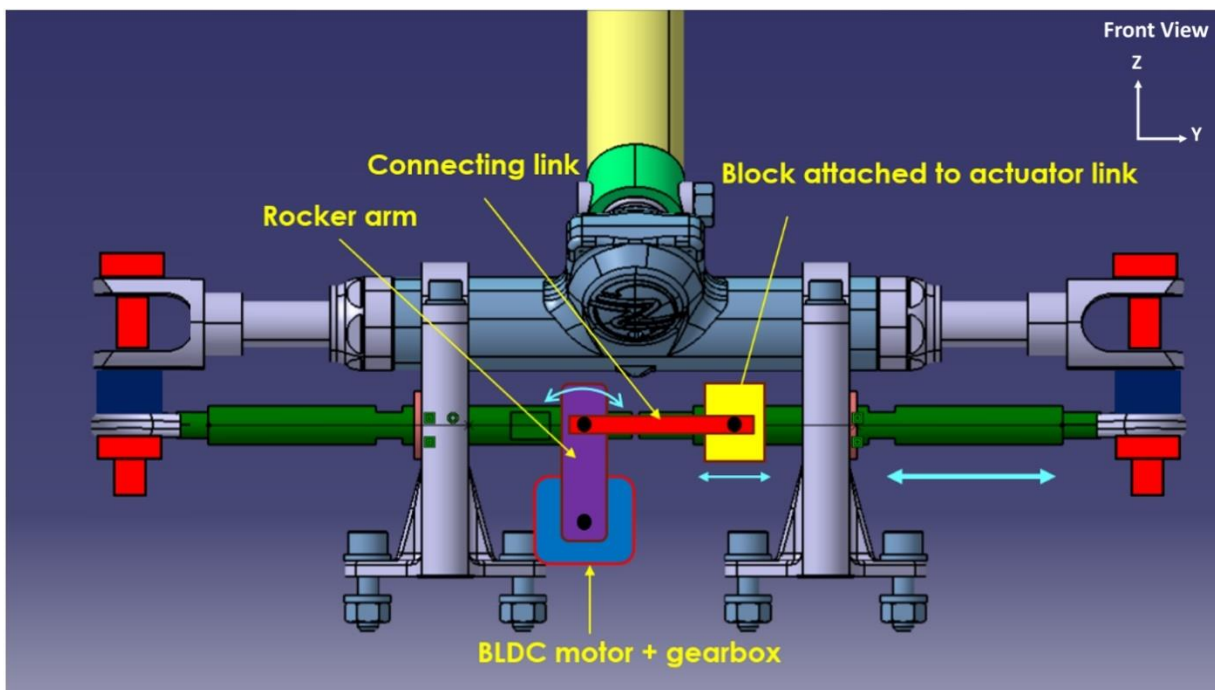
Solution 4 - BLDC motor + gearbox with a rocker mechanism
